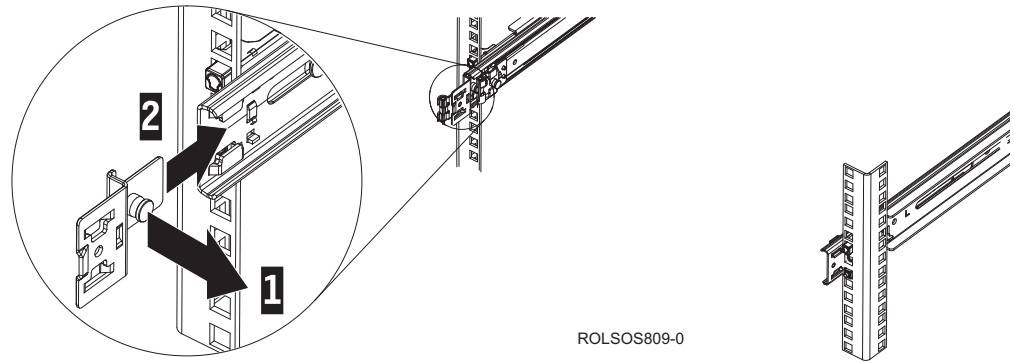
Mounting bracket pin extended and mounting bracket installed into slide rail
